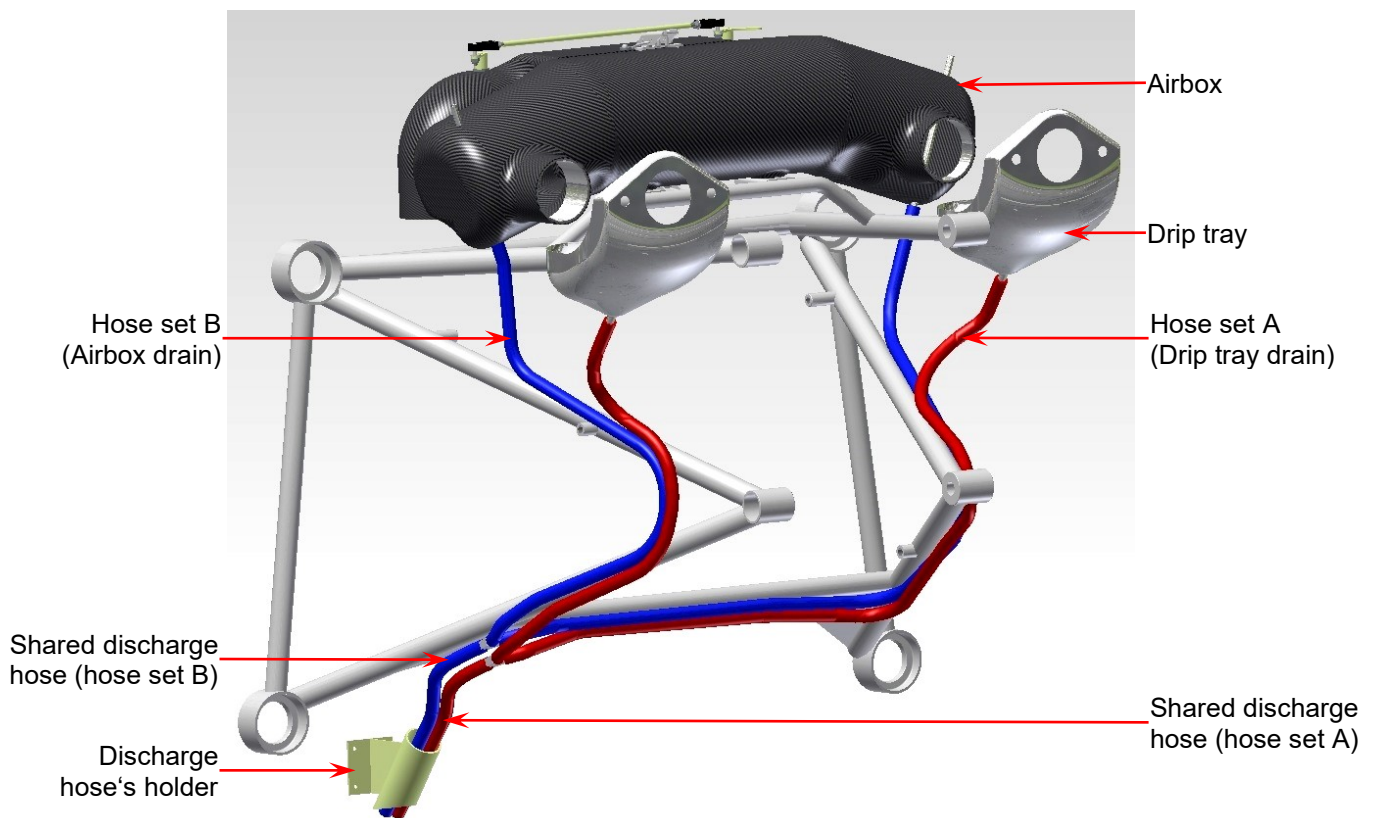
Connecting of drain hoses – Rotax 912, fixed landing gear (front view)
